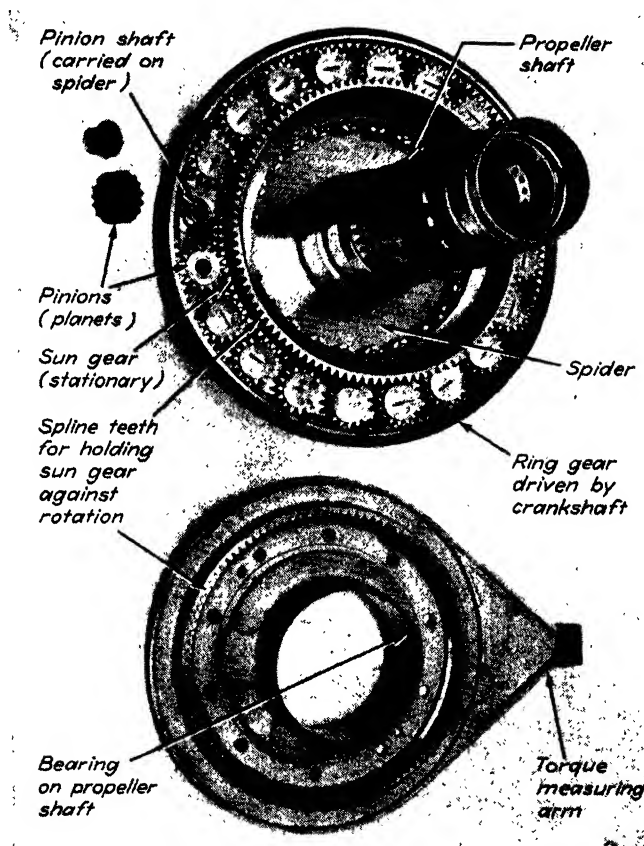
Planetary propeller-reduction gear. (Wright Aeronautical Corporation.)
